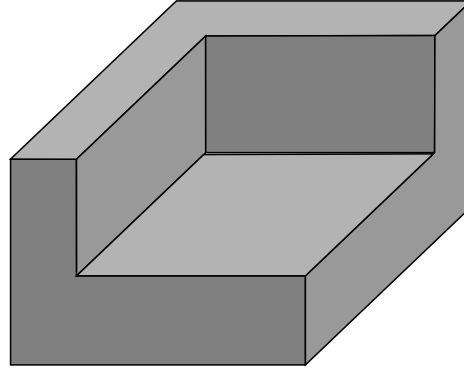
Schematic of the mechanical interface used to fix the photodiode to the printer header.
